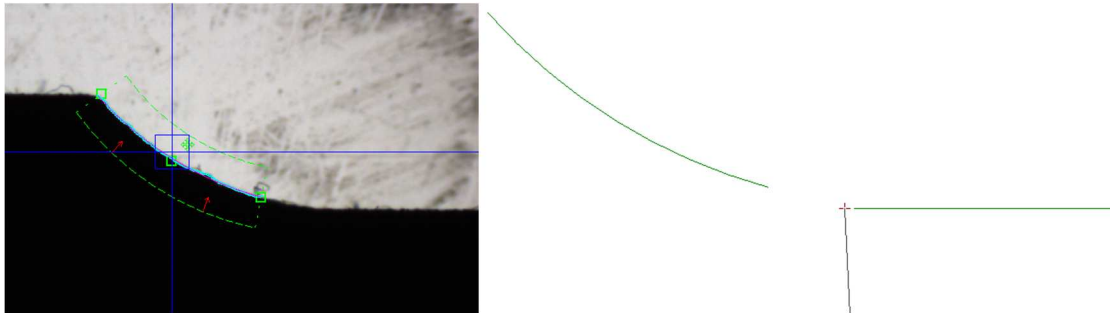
Optical Measurement Challenges. Example of an instance in which the Micro-Vu machine was unable to determine the intersection of the shoulder radius and the gauge length. Left: Camera view. Right: Calculated geometry.
